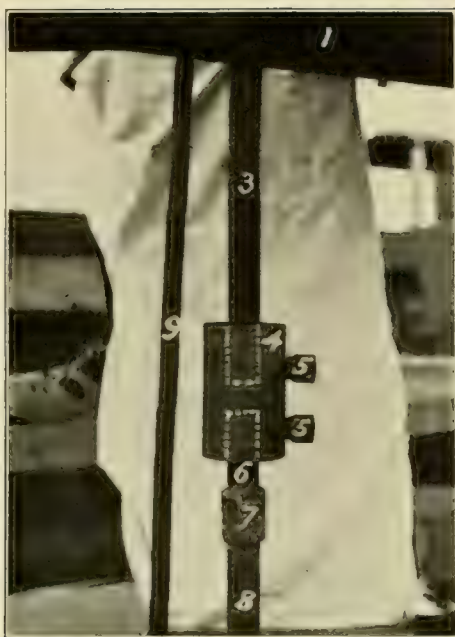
Detail of propeller shaft couplings. 1, underside of shaft beam; 3, upper steel portion of shaft, which bears gear on top and enters sleeve coupling below; 4, cast sleeve coupling; 5, set screws holding shafts in coupling; 6, short piece of steel shaft; 7, pipe coupling; 8, lower part of shaft, made of pipe; 9, measuring stick, made of sections 6 inches long.
